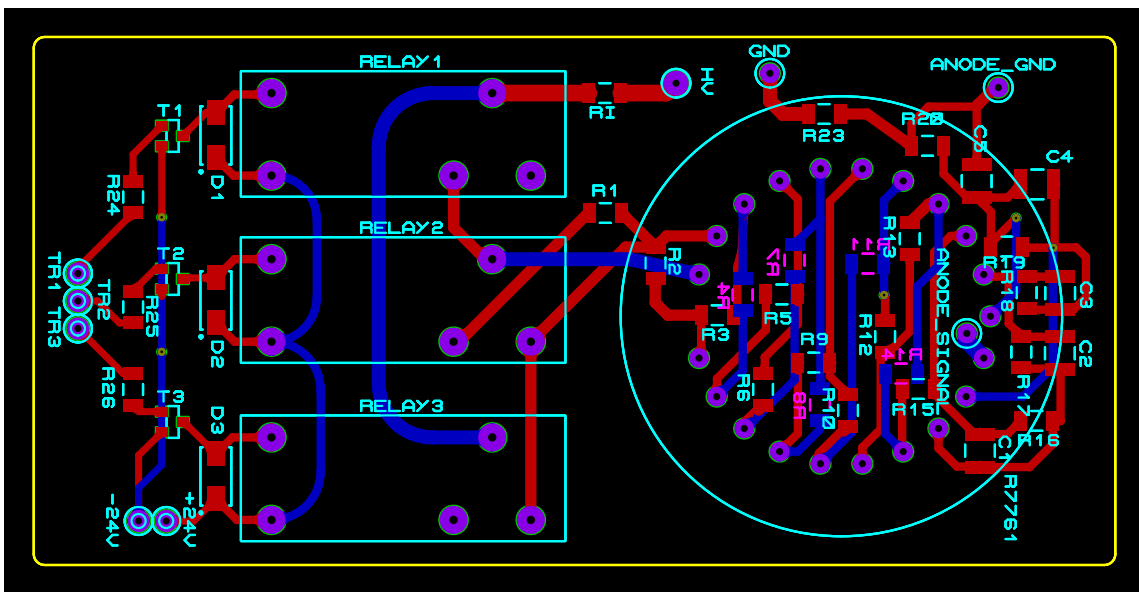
Top and Bottom side PCB layout of the remote controlled R7761 photomultiplier tube.
